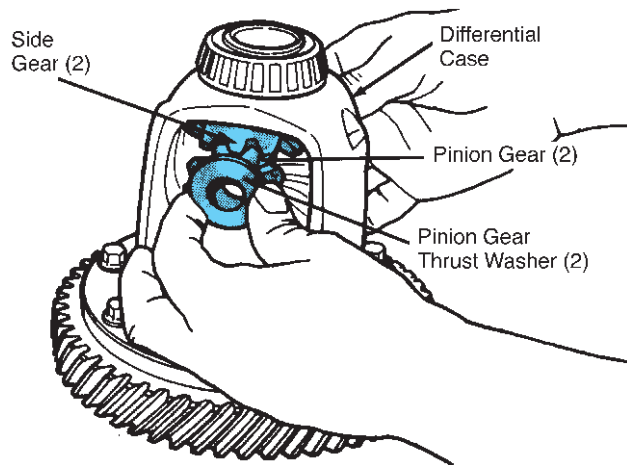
With the pinion shaft removed, the pinion gears can be rolled to the case windows and removed; then the side gears can be lifted out of the case. (Courtesy of DaimlerChrysler Corporation)
